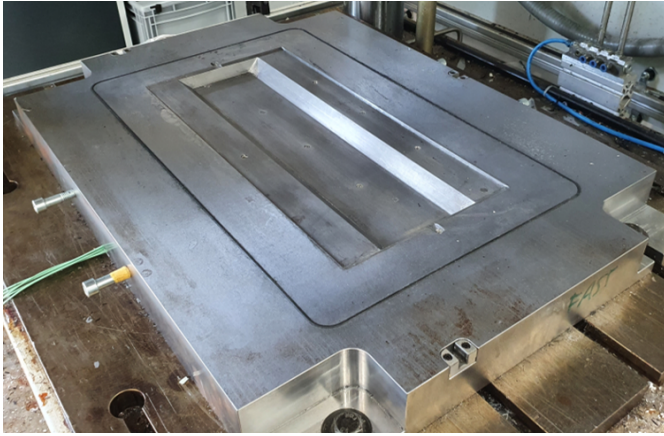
RTM tool for sandwich manufacturing; the sandwich geometry is milled out of the lower mold
